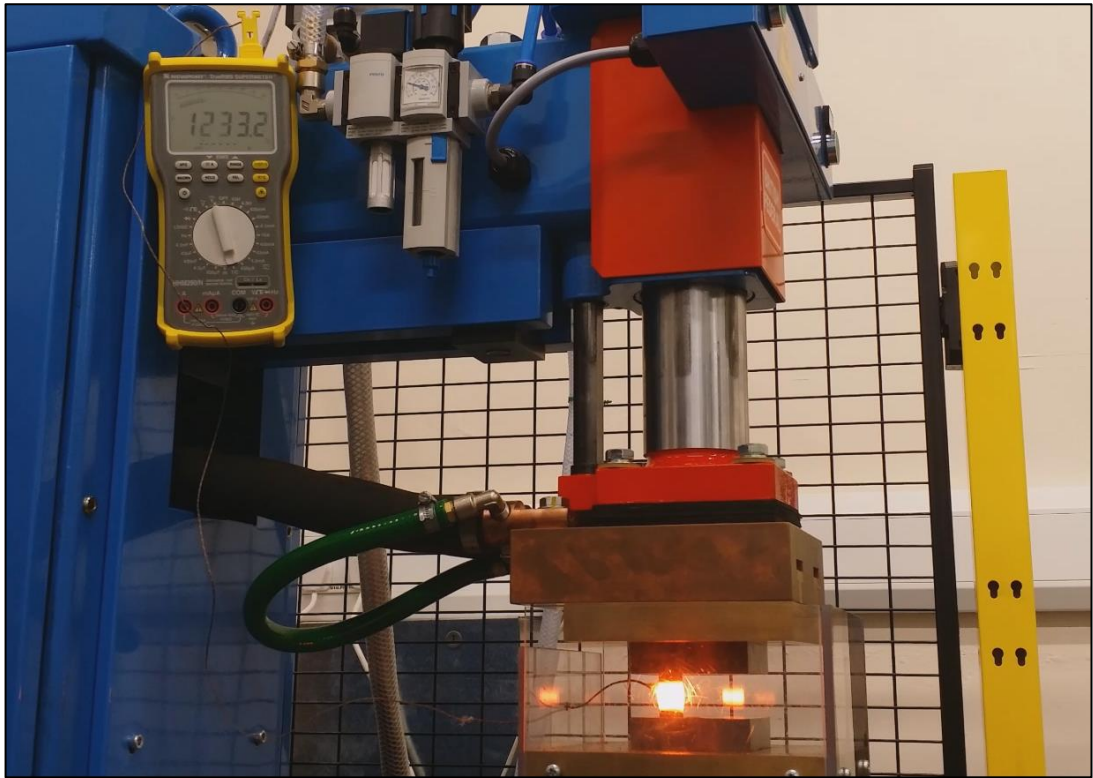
Die set with powder material during the open-air electrical-field activated sintering and forming experiment using Projection Welding machine.
